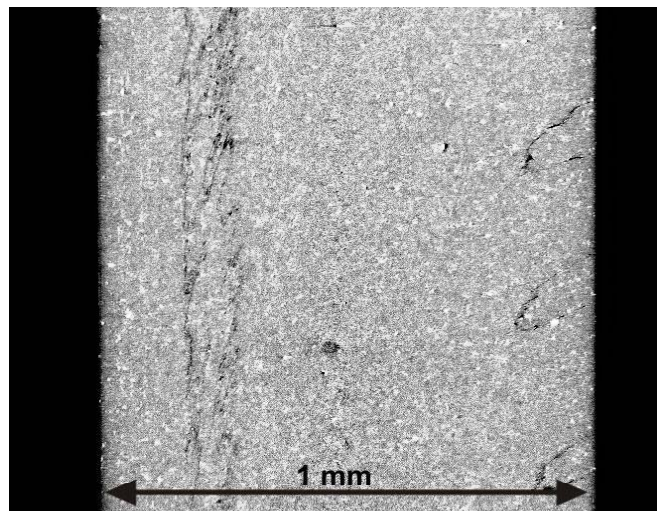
Cross section of the root flaw in a plane parallel to the welding direction.
